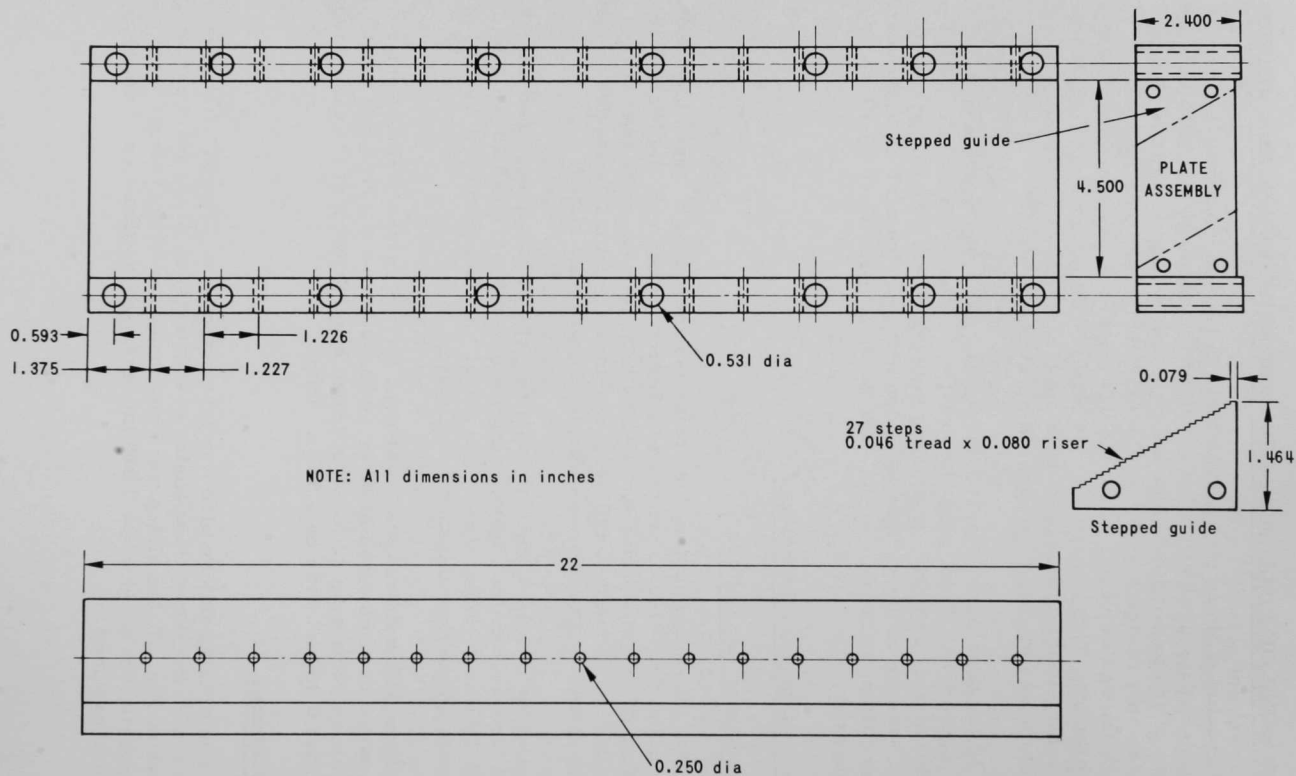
Brazing Fixture for Full-scale Dummy Fuel-plate Assemblies
